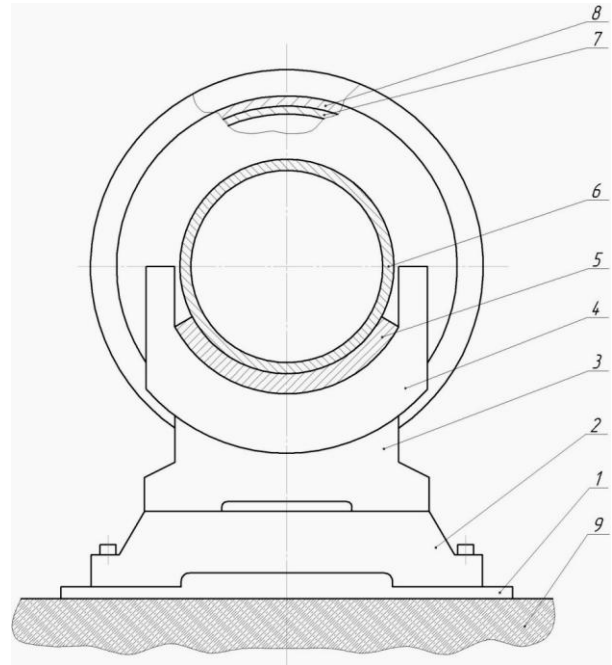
Rotating aggregate assembly: 1 – force plate; 2 – intermediate bearer; 3 – spherical bearing; 4 – bearing case; 5 – bush; 6 – covered pin; 7 – hunch plate; 8 – aggregate case; 9 – footing
